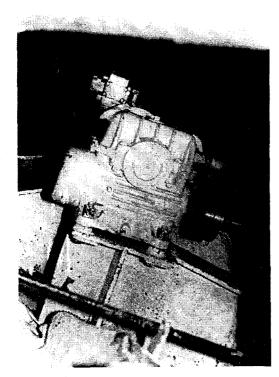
View through hole in deck of CBM's Store, showing bevel gearbox before removal
